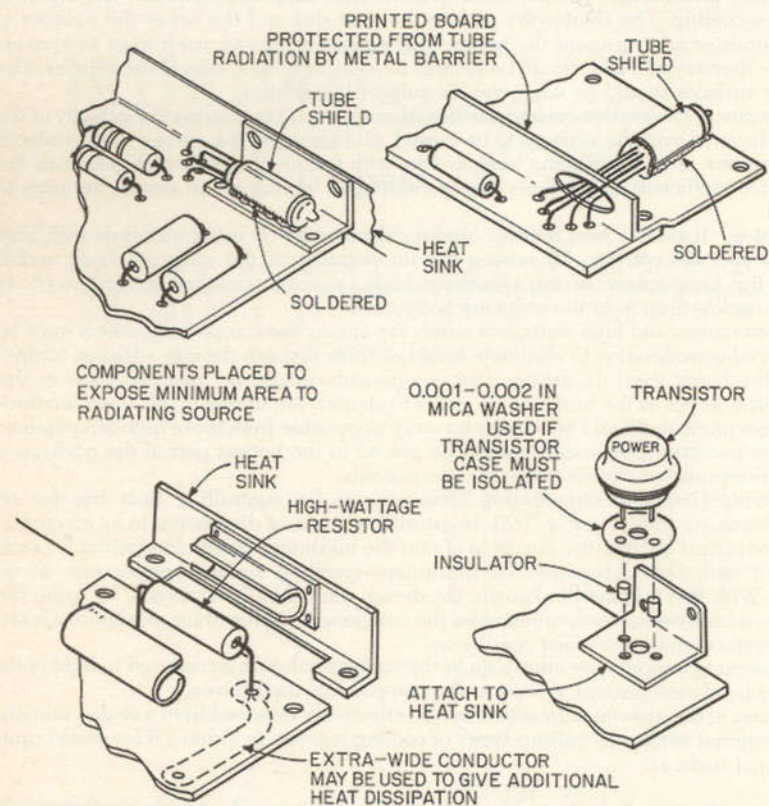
Component-mounting arrangements for facilitating heat transfer in printed board assemblies.
